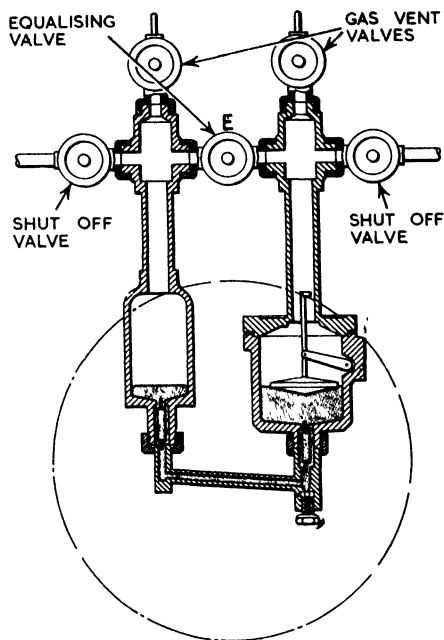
VALVE ARRANGEMENT BUILT INTO THE METER HEAD
